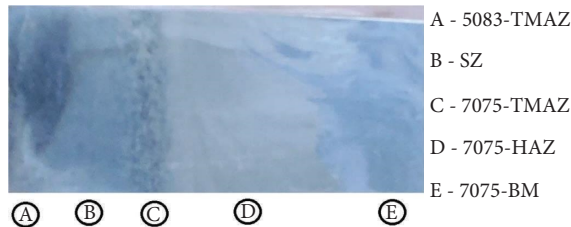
Macrostructures of the weld joint fabricated at 1100 rpm.
